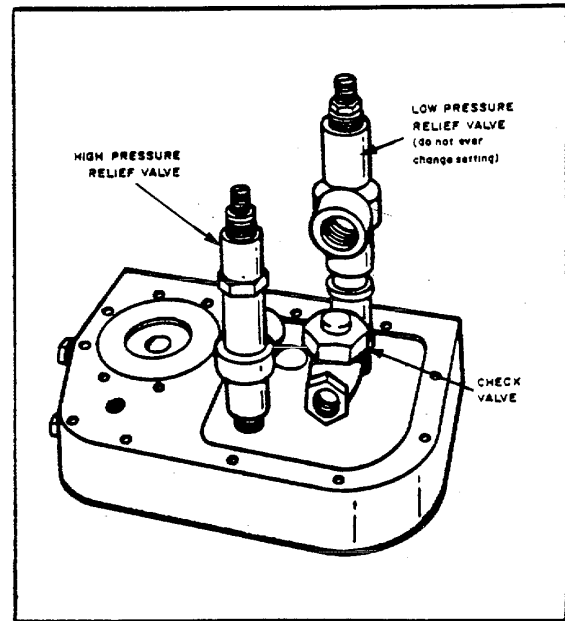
High Pressure Relief Valve Adjustment for 0800 and 1000 Series Shears
